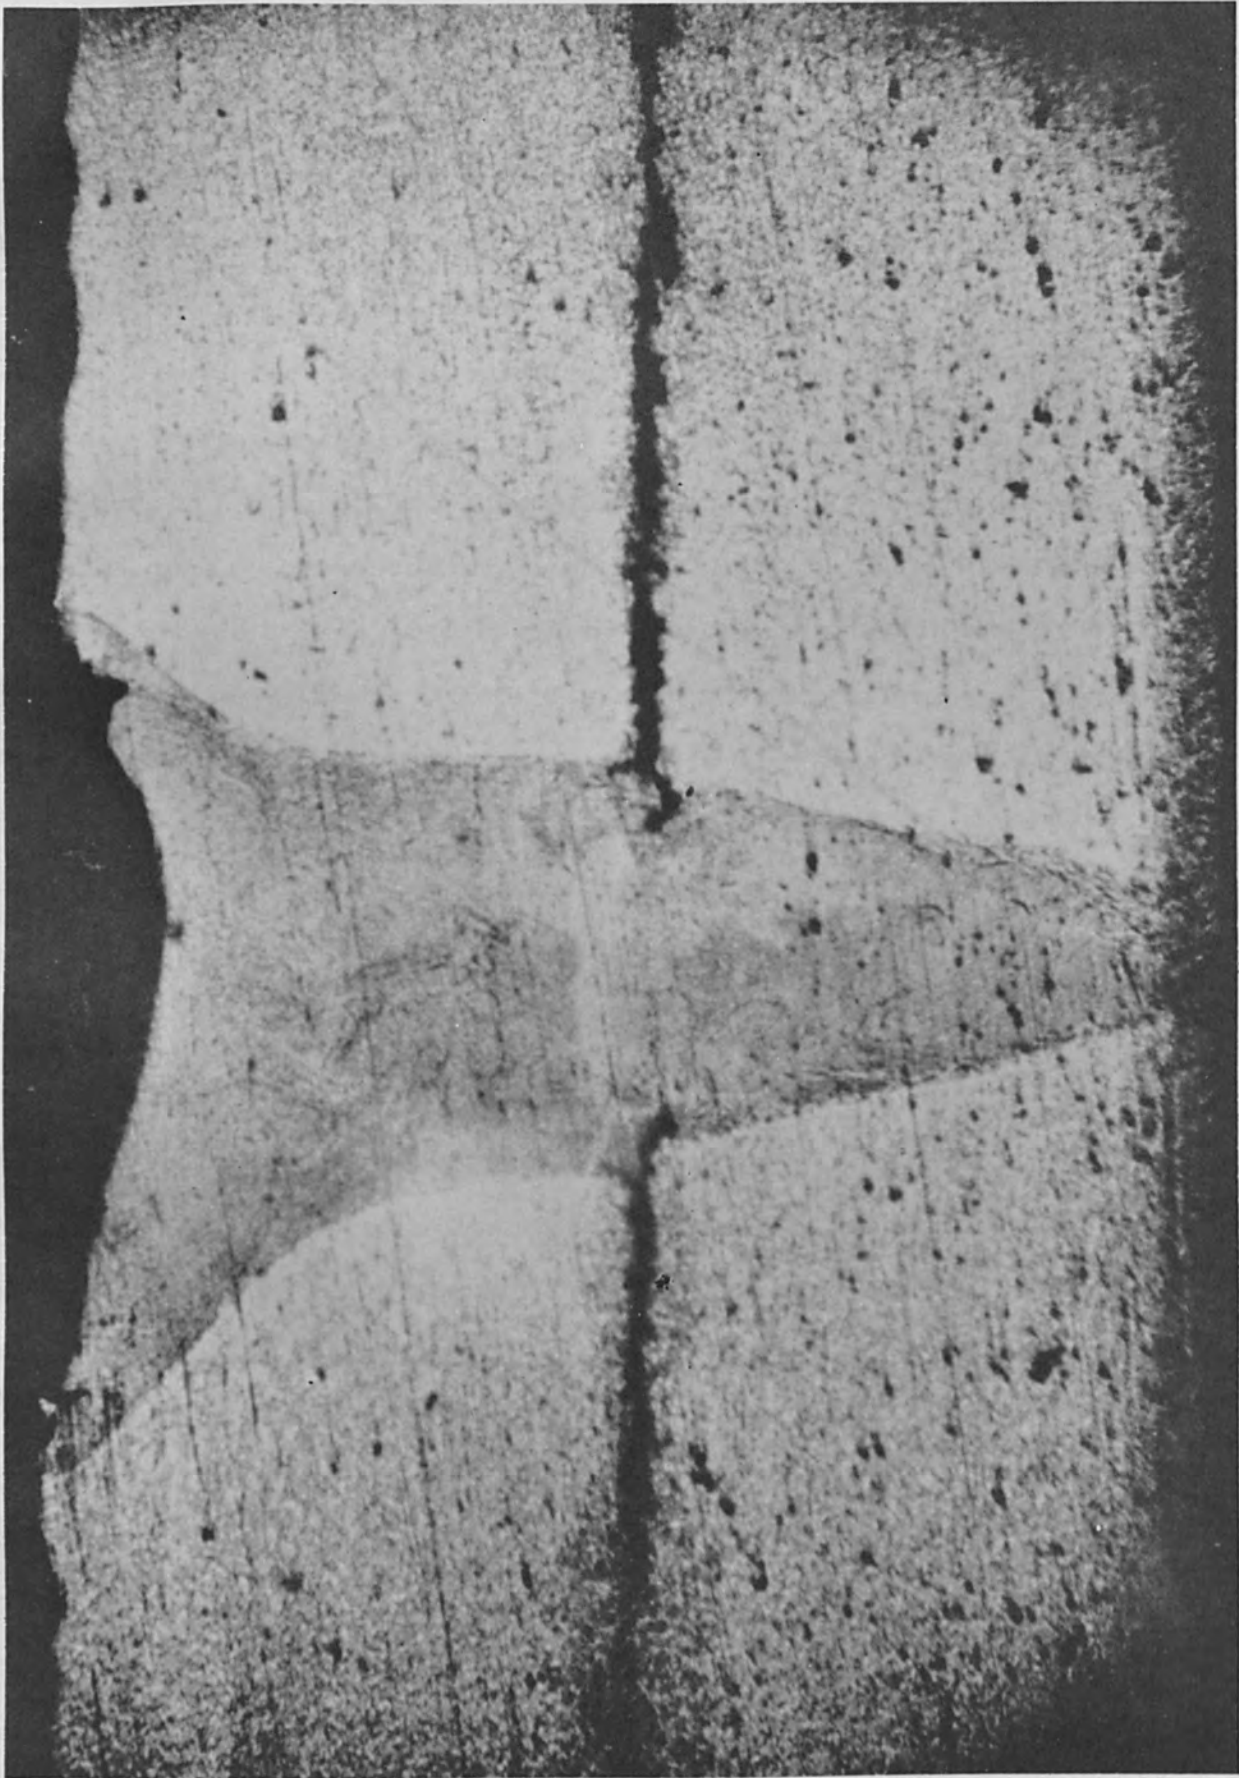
Laser spot weld between two aluminum sheets, 1/32-inch-thick,
